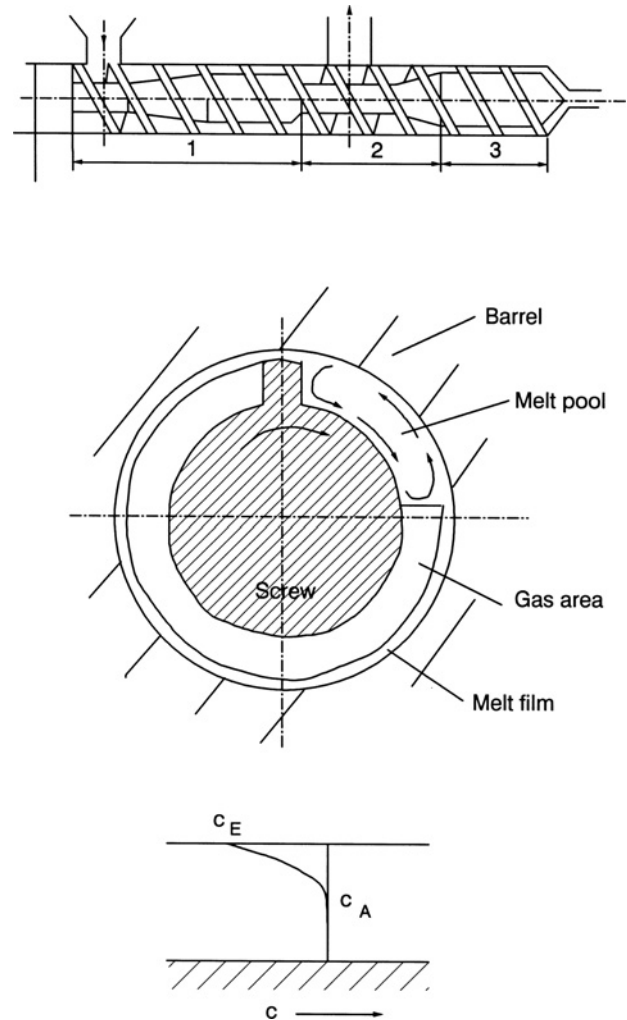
Degassing in a single-screw extruder. Zone 1 consists of a typical plasticating screw section; zone 2 is a deep channel section with a vacuum port; zone 3 is a metering section. The channels in zone 2 are partially full to facilitate degassing.
